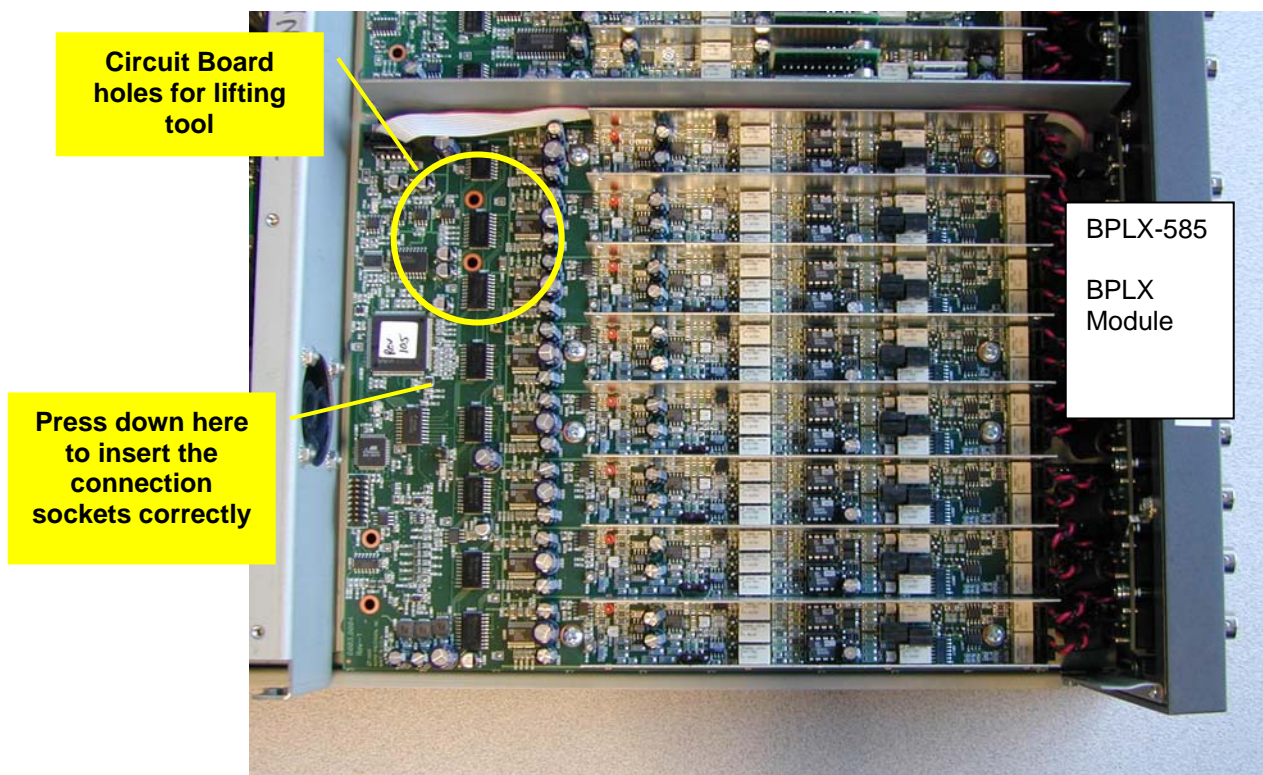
Removing the BPLX module form the APX-585 Chassis plate.
